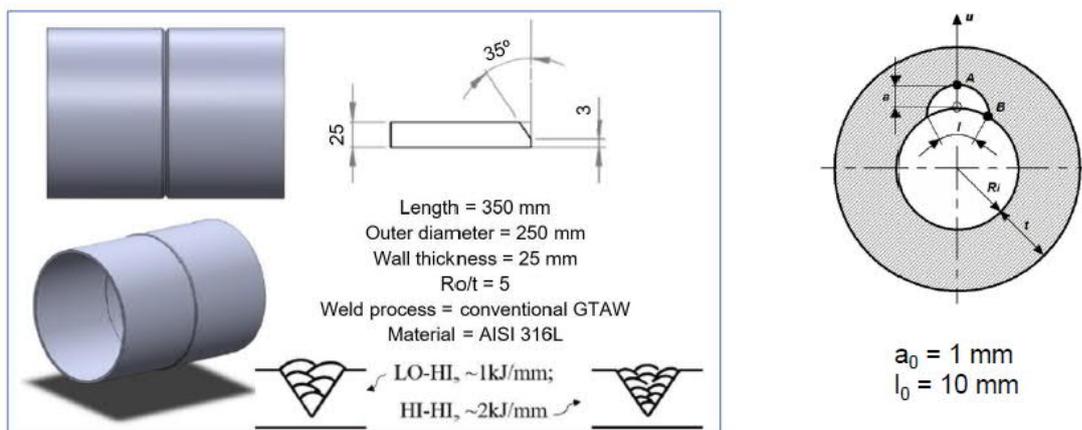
Weld and Pipe Geometry for PBC-6 Case
